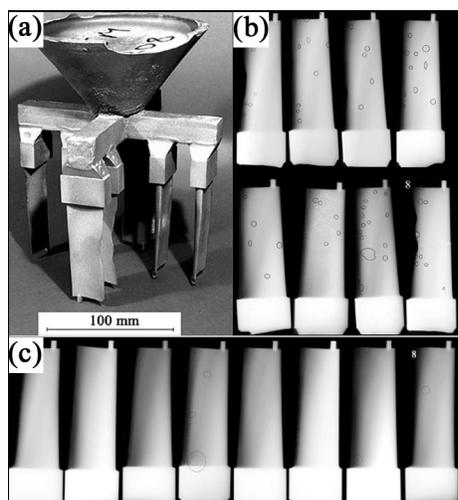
(a) Top-gated mould of TiAl turbine blades; (b) many small bubbles formed with a mould temperature of 1000°C; (c) much improved quality with a mould temperature of 1300°C.
